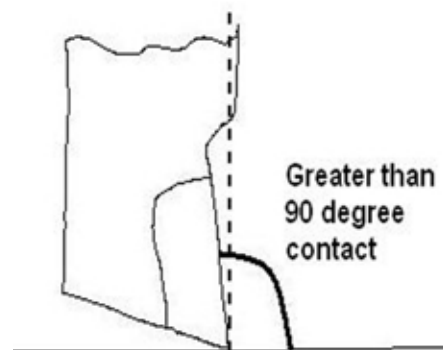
Positive Rake Angle of a tool contacting a workpiece
